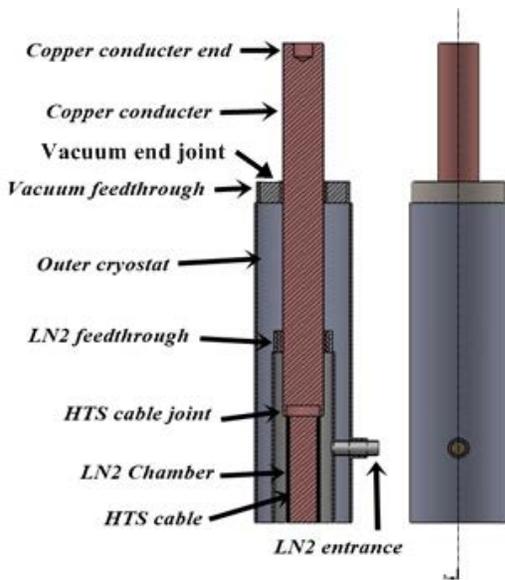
Sectional 2 D drawing of HTS cable terminal.
